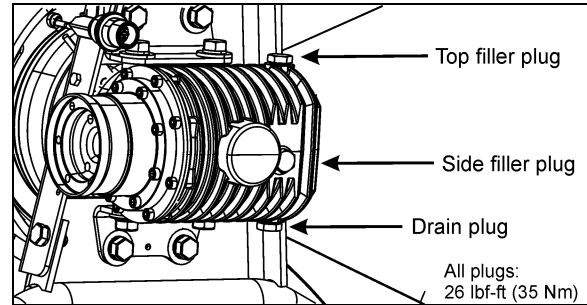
RIGHT ANGLE GEARBOX 05118
